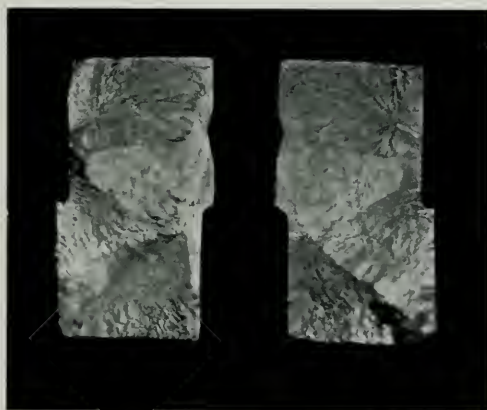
Lead-tin Eutectic Alloy, Hot Fracture.
